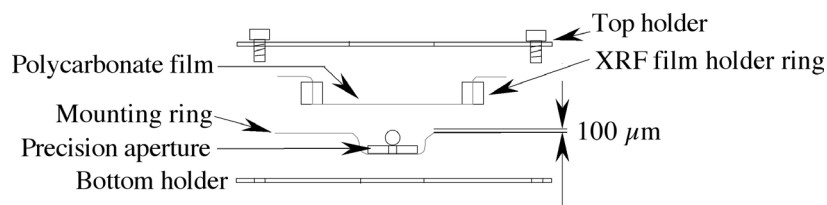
Drawing of fixture to align and hold capsule and aperture in place for coating a bump on a capsule.
